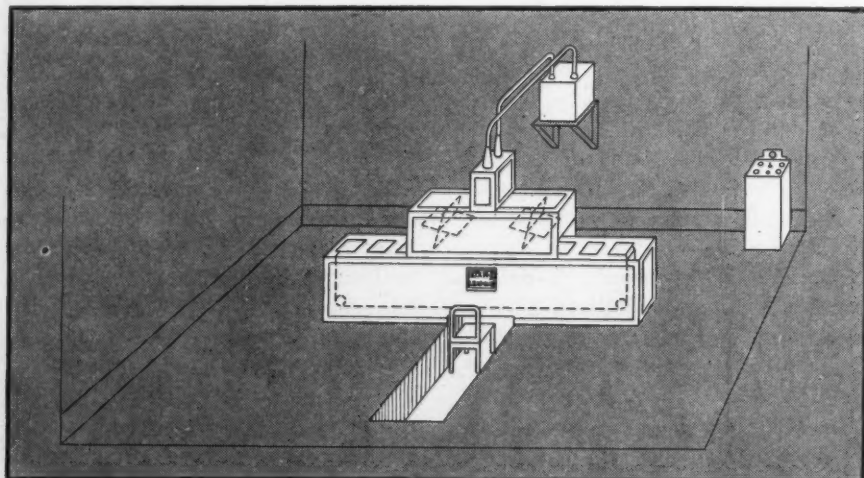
Schematic drawing of conveyor fed, combination fluoroscopic-radiographic production machine.
